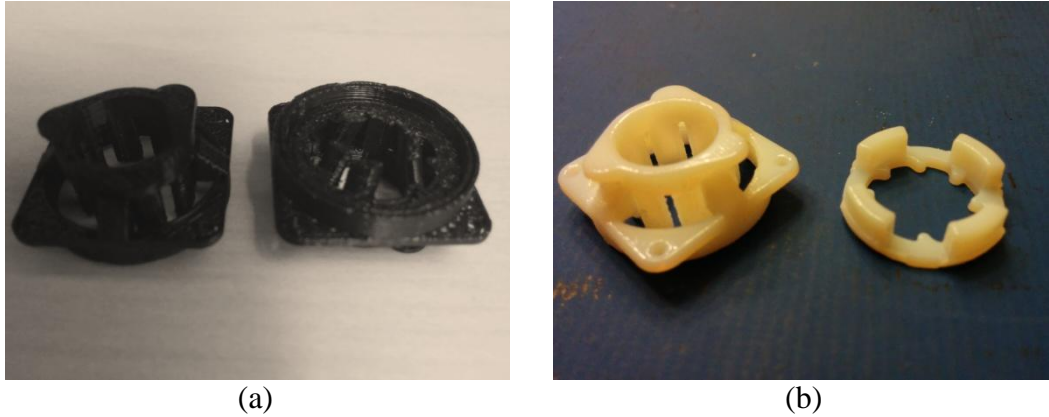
The printed models of the collets based hair clearing socket, (a) model printed at Polytechnique Montreal (b) Model printed with the Objet printer
